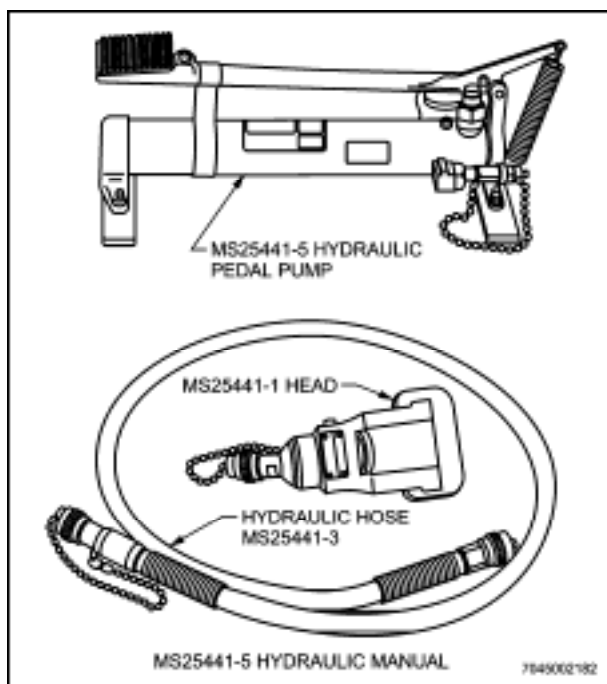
Power Crimping Tools – Large Copper Terminal Lugs
